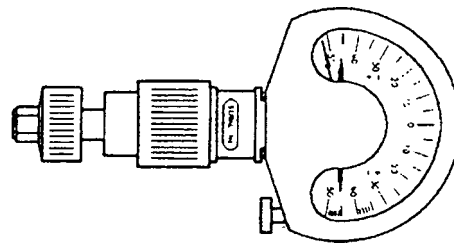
Gaging a 3.5 mm Female Connector Using a Push-on Type Gage
